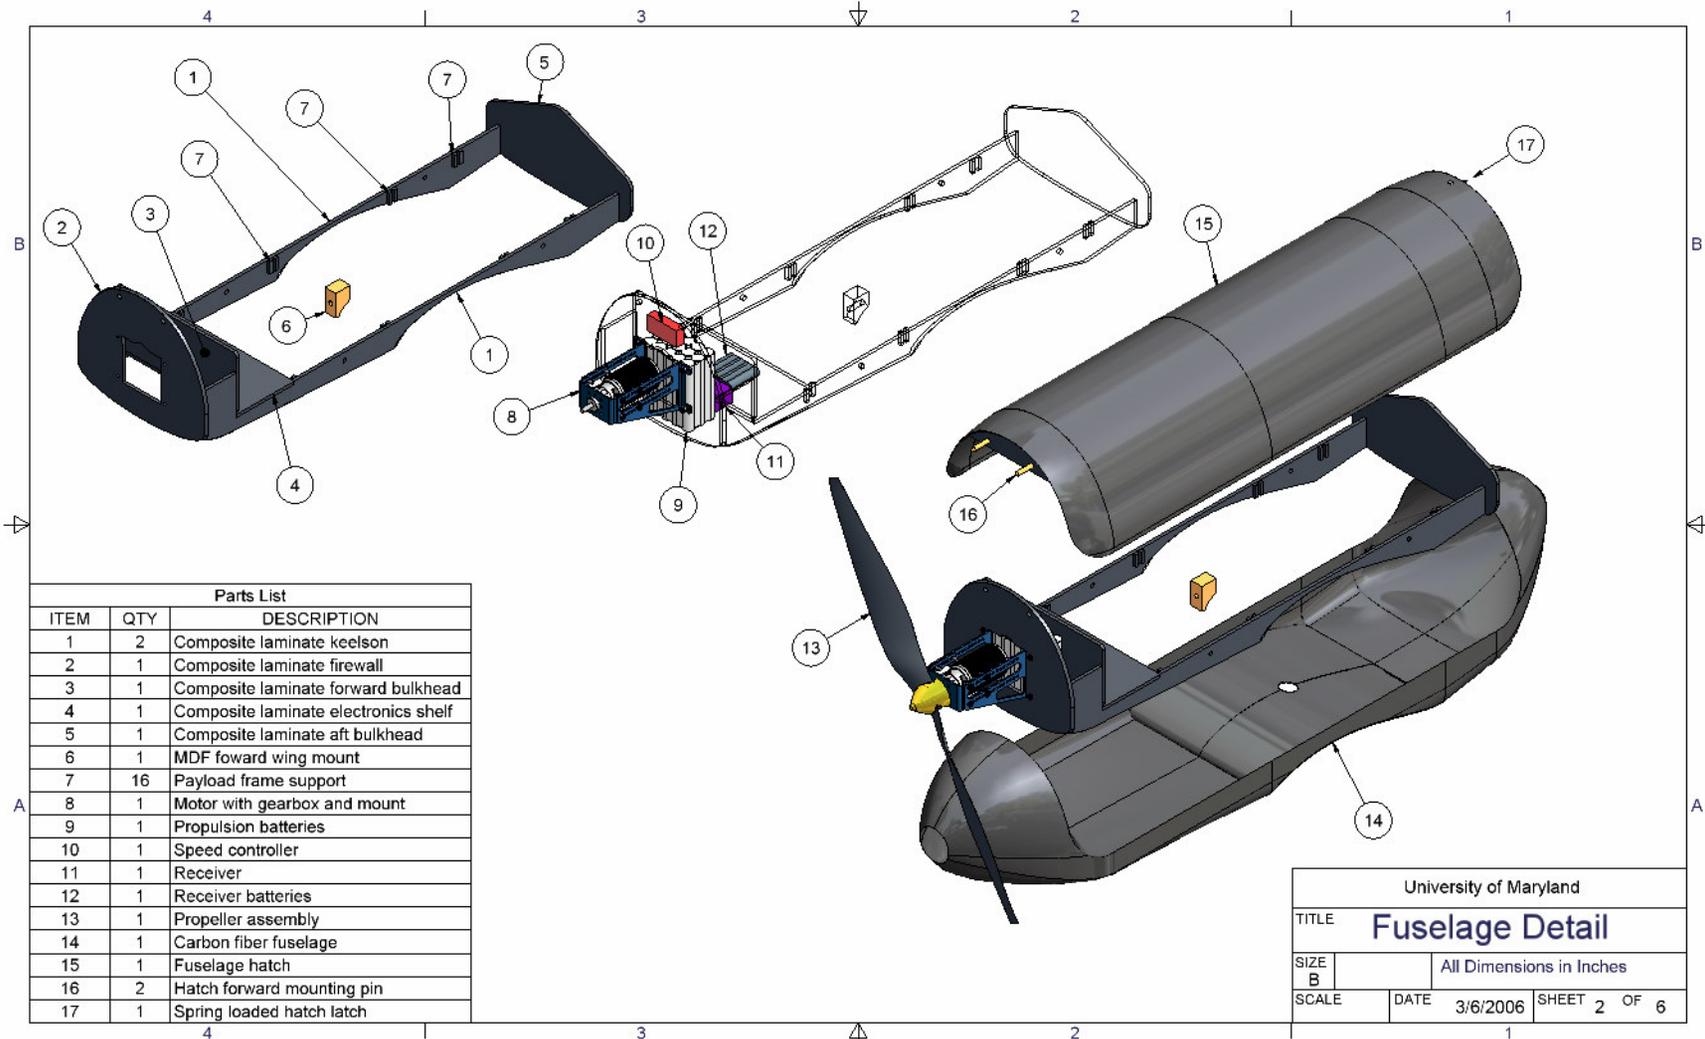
Detailed CAD Drawing – fuselage structure.
